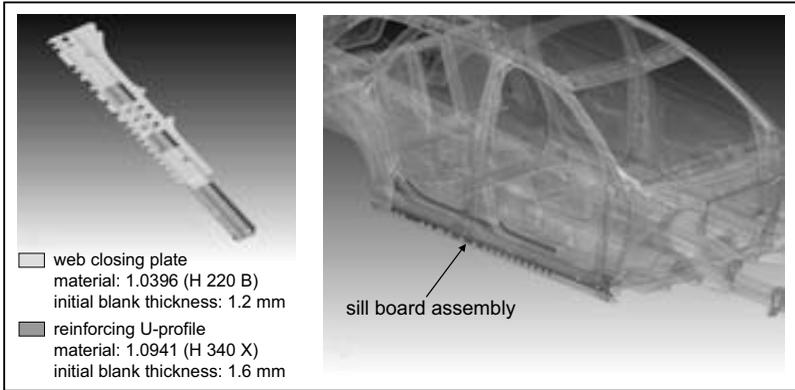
Sill board assembly consisting of a reinforcing U-profile and a web closing plate positioned in an automotive frame structure
